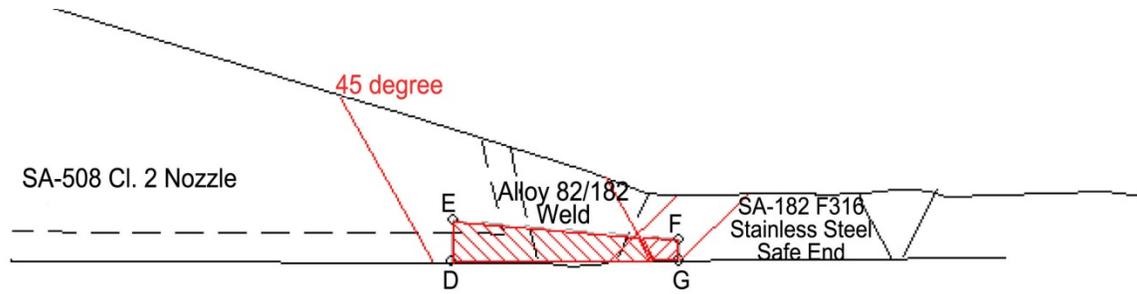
Pressurizer Spray Nozzle Weld Axial Scan CRV Coverage Assessment
